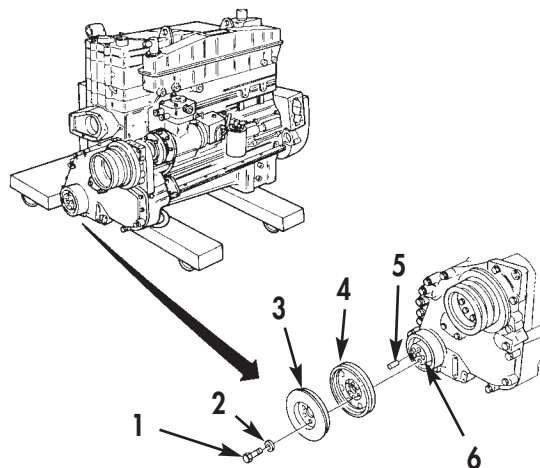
Vibration Damper and Crankshaft Pulley Installation.
